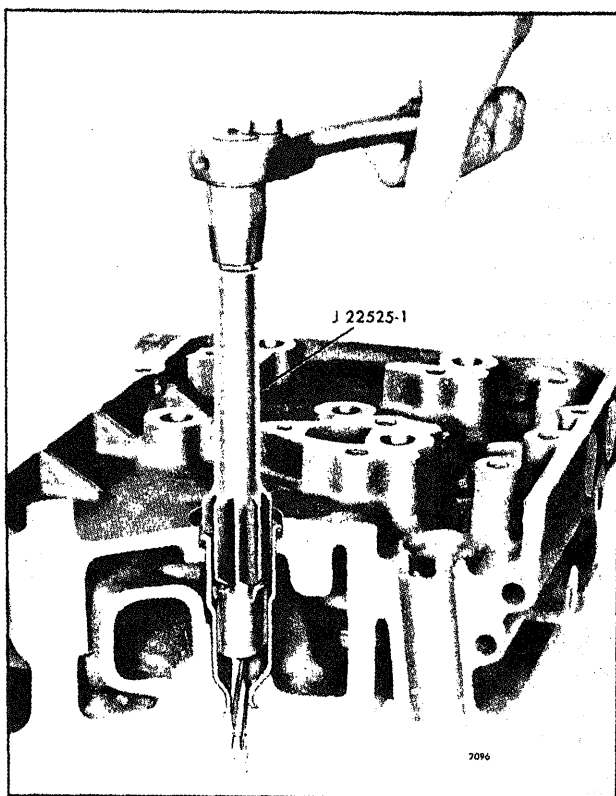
Reaming Injector Tube for Injector Body Nut and Spray Tip
